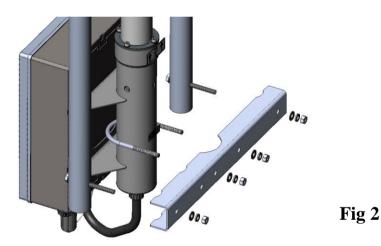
Exploded view of (PEANUT TYPE) Steering pole assembly connecting to the spigot of antenna with U-bolt & fasteners.
